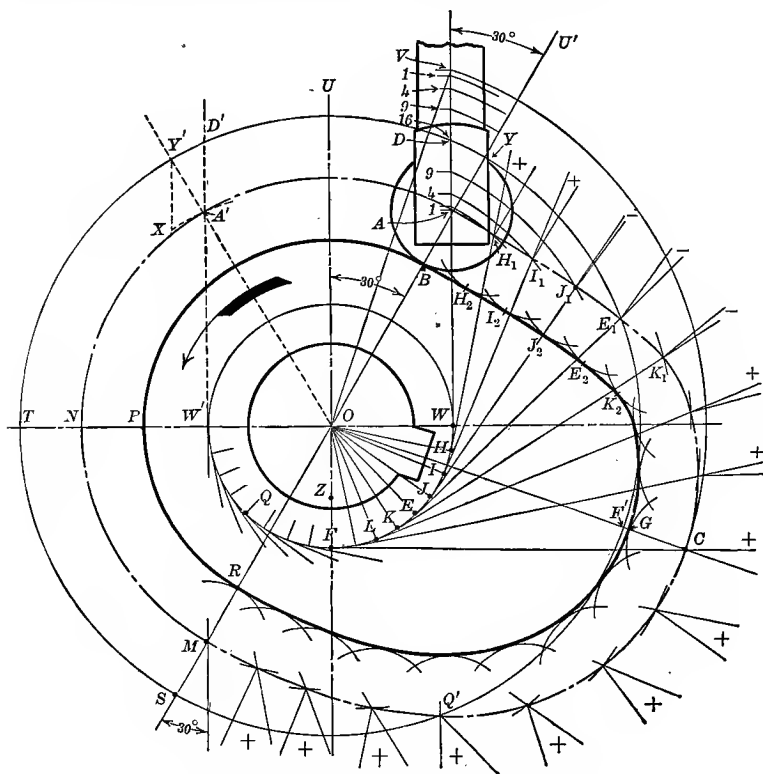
PROBLEM 6. CAM WITH OFFSET ROLLER FOLLOWER
